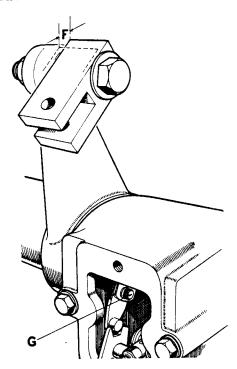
HOLD MECHANISM TRIP ADJUSTMENT
